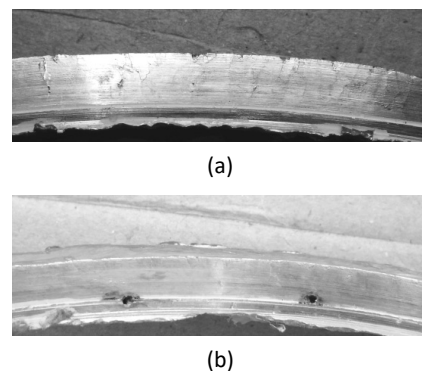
Cross section views: a) network of cracks, b) pores on inner side [13].
